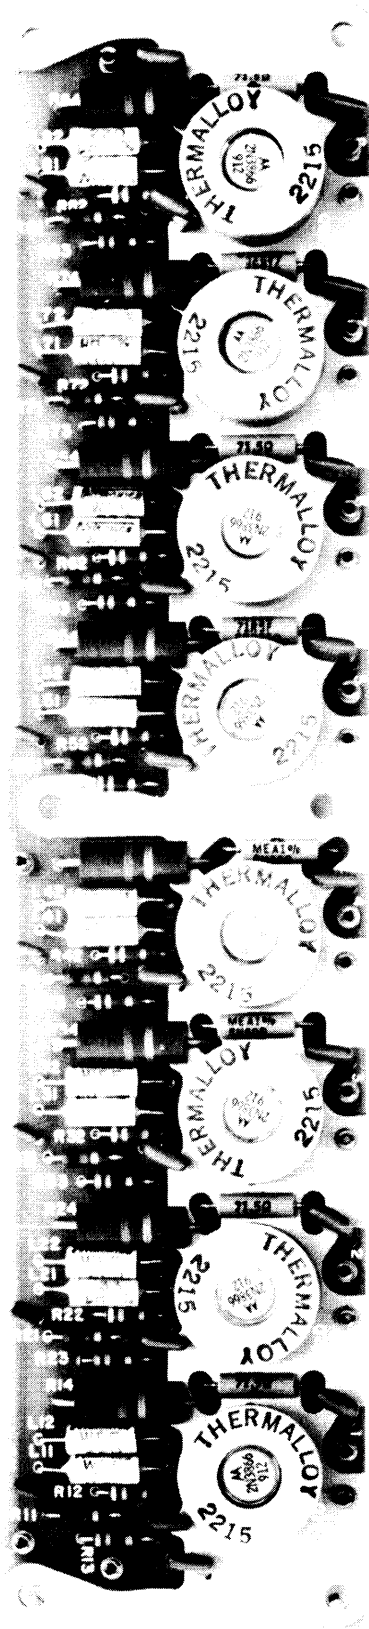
8 OUTPUT ASSEMBLY 1A4
